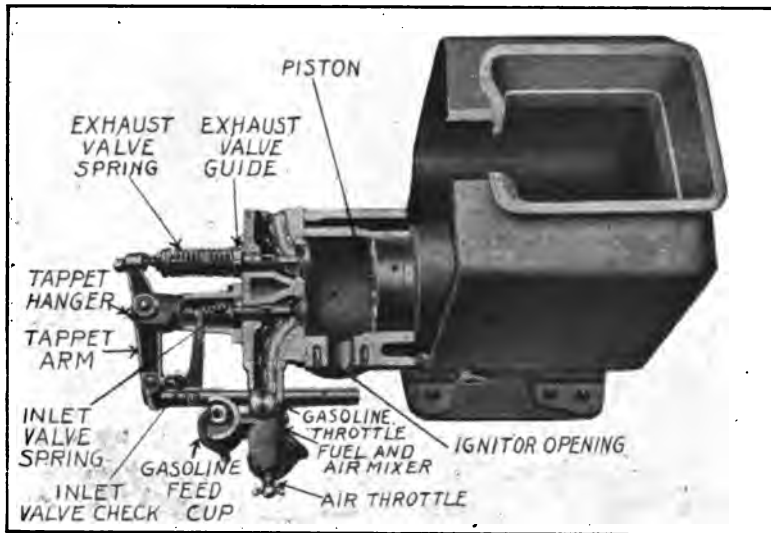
Part sectional view of hopper cooled farm motor cylinder with valves in head.
